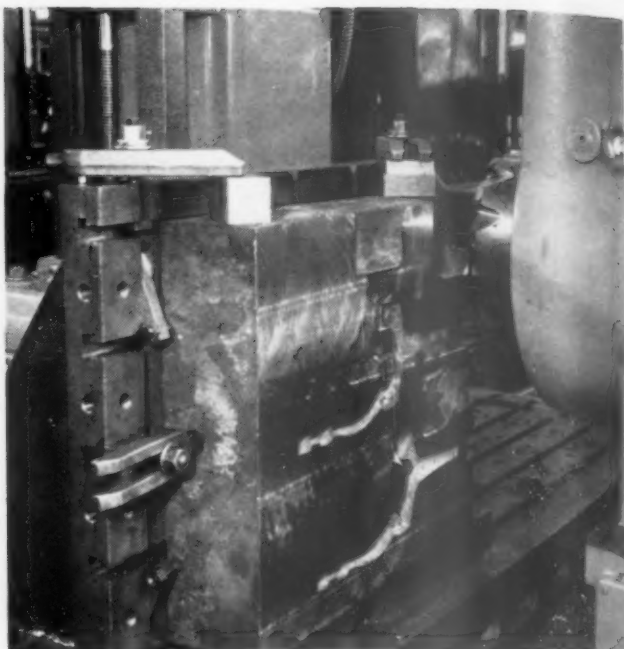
Milling a used forging die block on bed-type machine. Material hardness, 400 Bhn plus additional hard spots. Cutting speed, 100 fpm.
